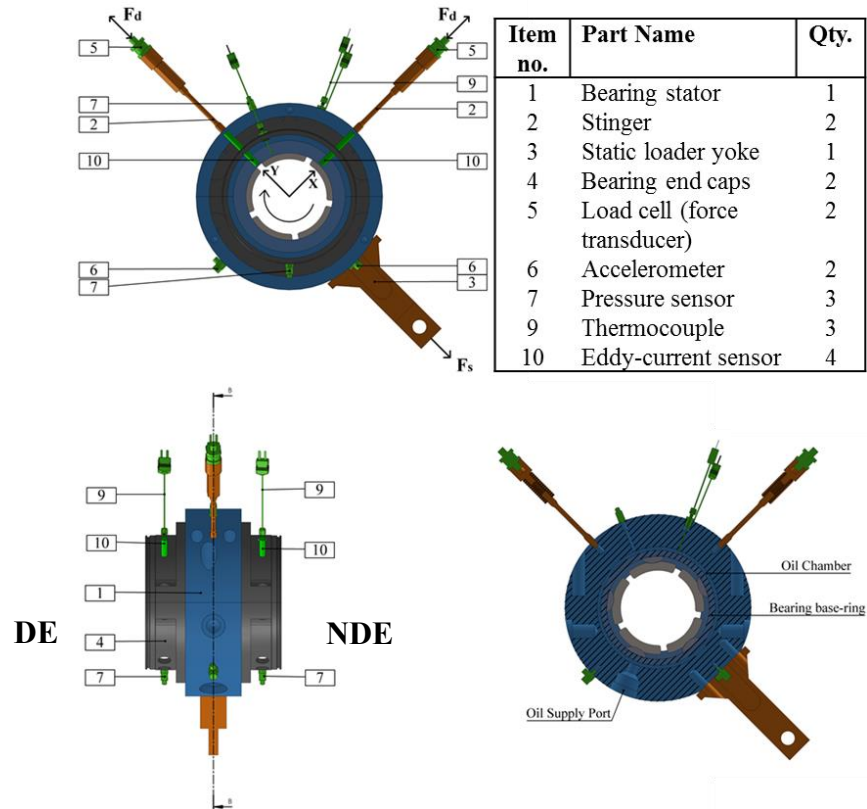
Front view (top), side view (bottom left) and section view (bottom right) of bearing stator with instrumentation.
